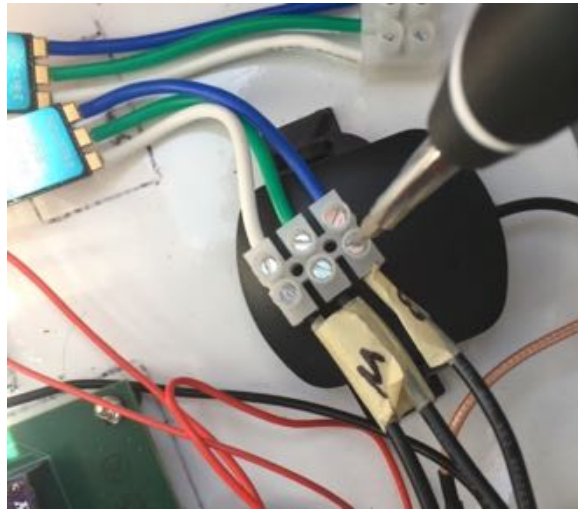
Size 3.0 flathead screwdriver securing cable connection.
